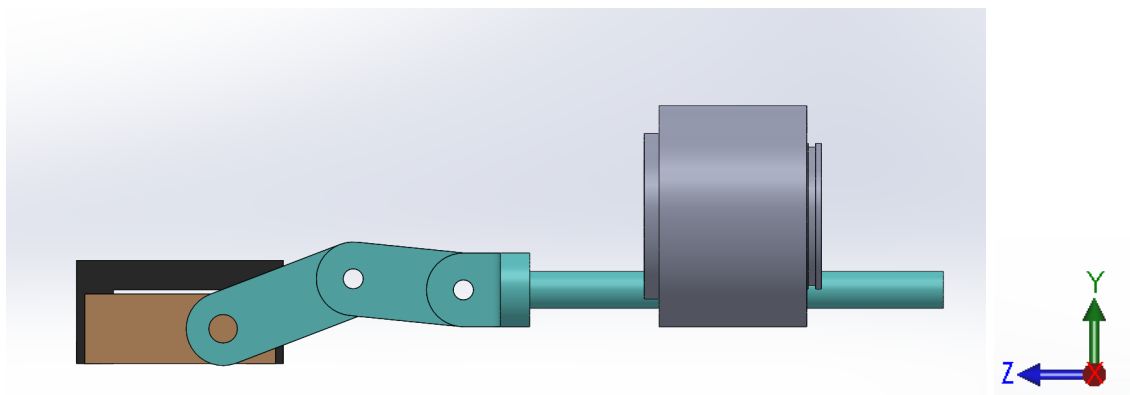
CAD Assembly for Slider Crank Mechanism
